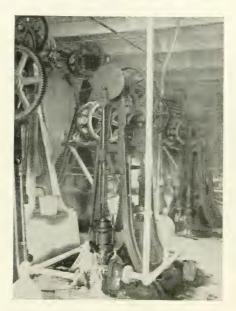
SLIP PUMPS, DRIVEN BY A 5 HP, I I20 R.P.M. INDUCTION MOTOR
